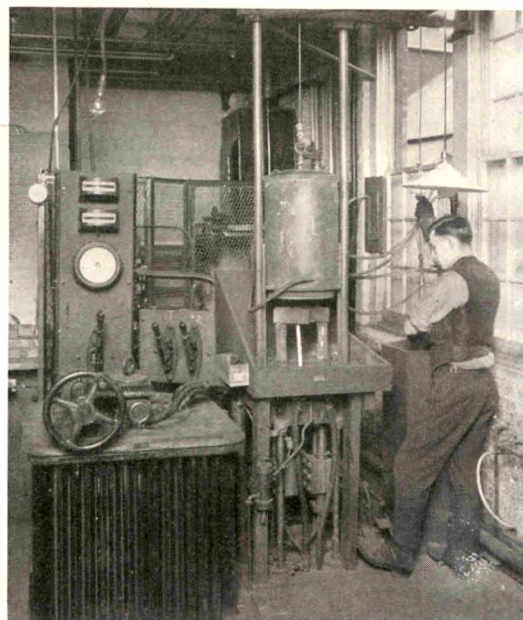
Sintering tungsten rod in hydrogen treating bottle (raised to show rod clamped in position).
